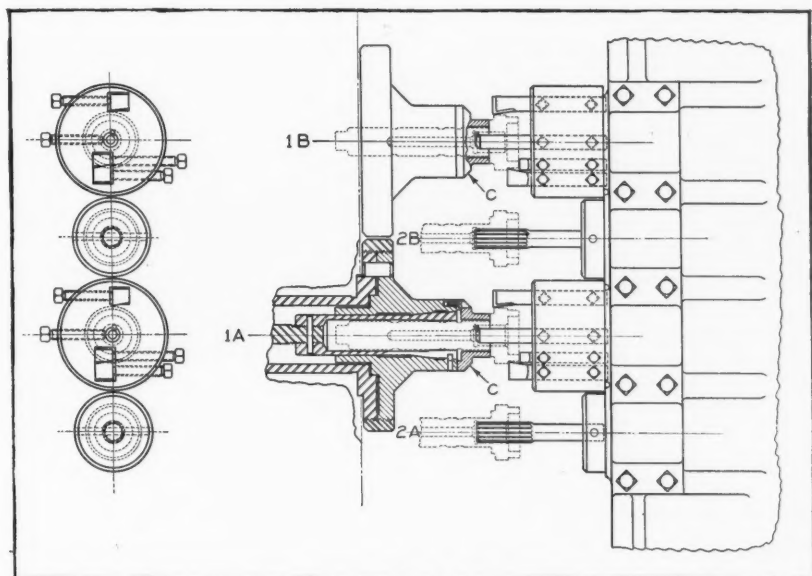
Equipment provided on a Double-spindle Production Lathe for machining Transmission Clutch Shaft
